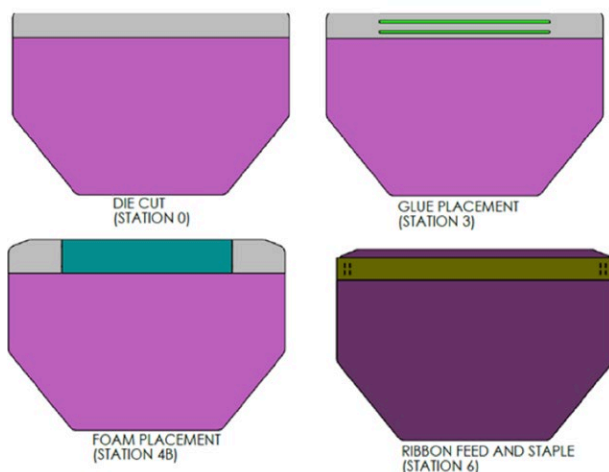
Four-step process for face shield assembly. [Courtesy Oak Ridge National Laboratory]
